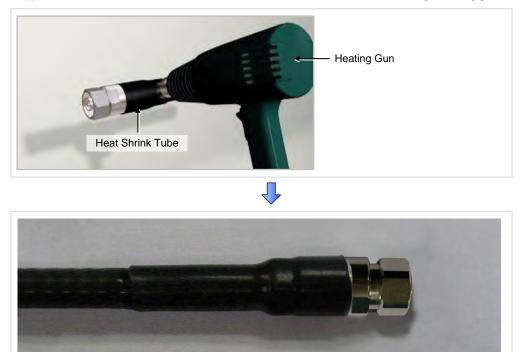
Assembling the Din type-male (1/2 in. Feeder Line) Connector (2)
